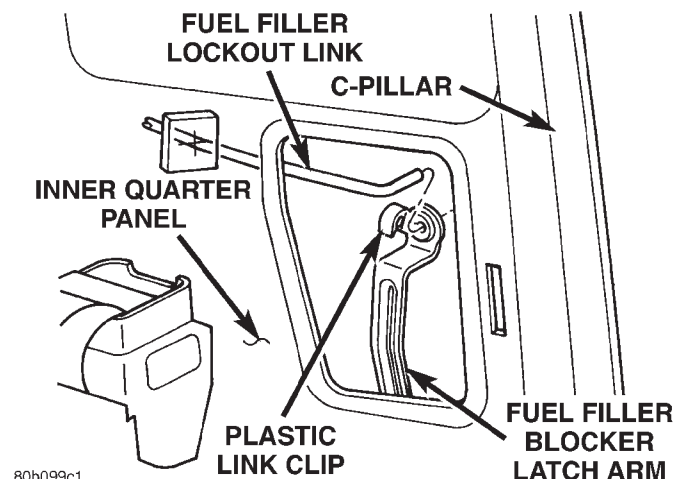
Fuel Filler Lockout Link at Latch Arm
